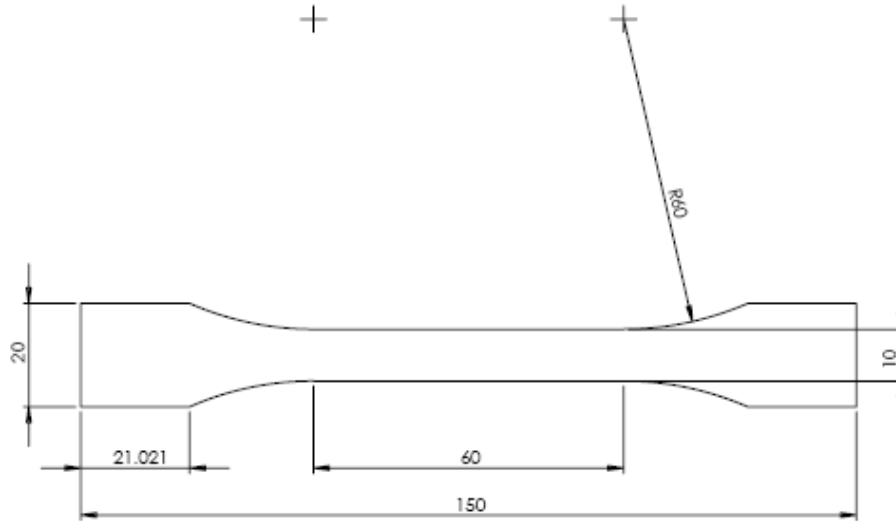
ASTM standard creep test specimen dimensions. [6]
